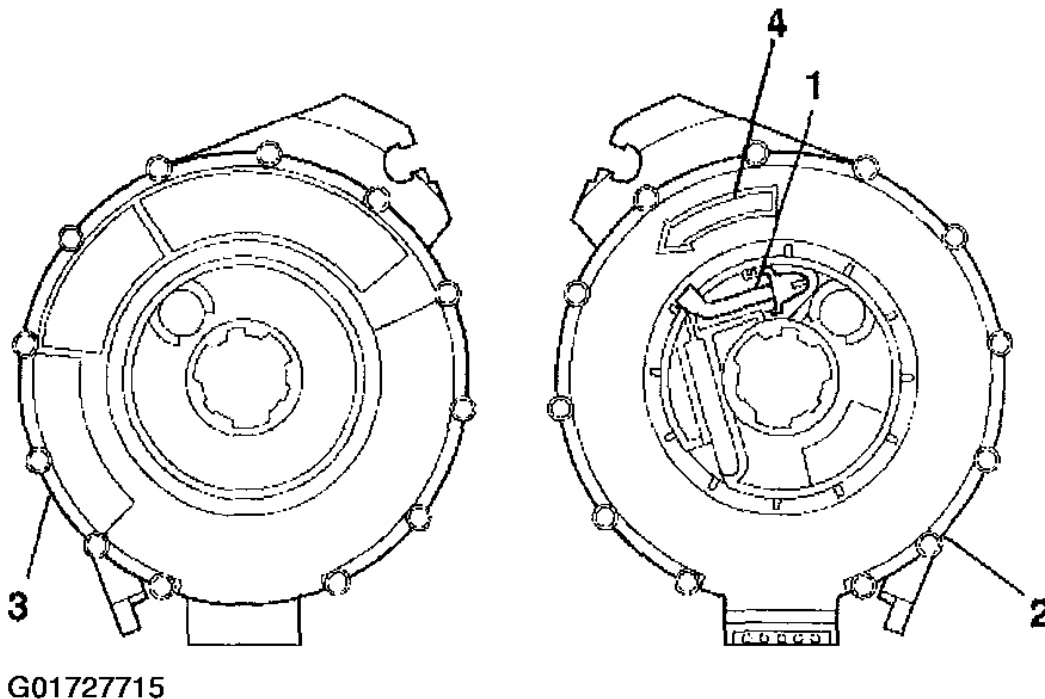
Identifying Inflatable Restraint Steering Wheel Module
